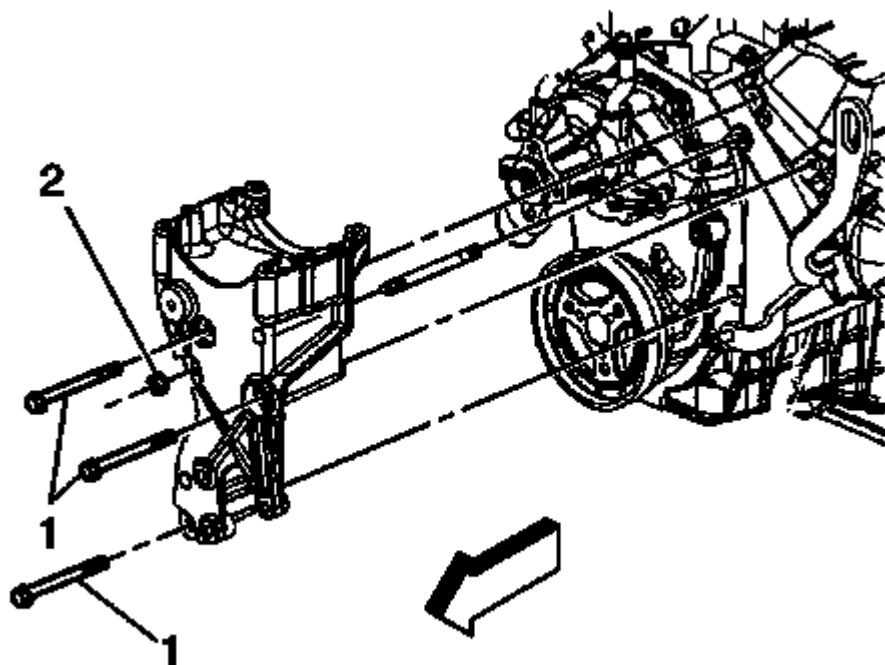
View Of P/S Pump Rear Bracket Front Nut
